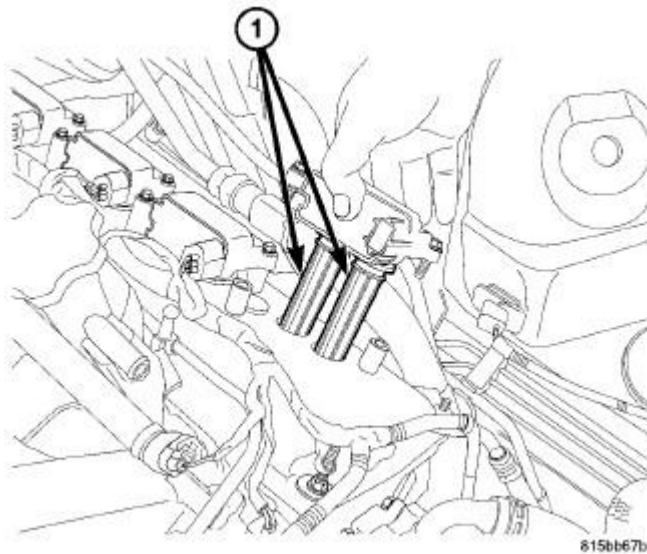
IGNITION COIL REMOVAL - 6.1L
